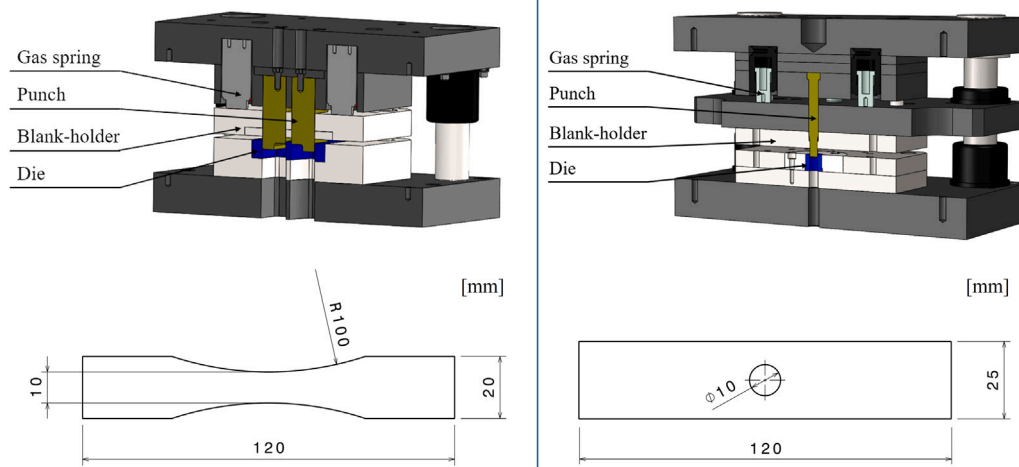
Trimming tools and geometry of trimmed specimens (left). Punching tools and geometry of punched specimens (right).
